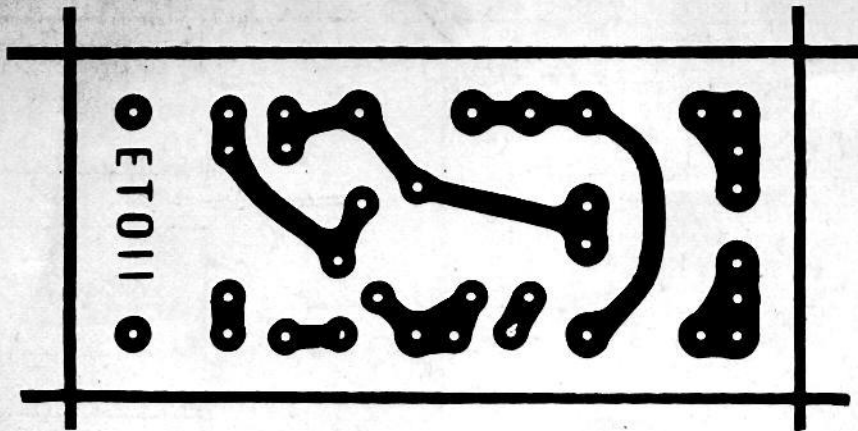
Foil pattern of the printed circuit board. Note that this is shown here exactly twice full size.
